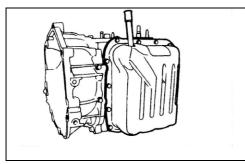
A-125 (77) Install speedometer gear. See Fig.11A-126.
